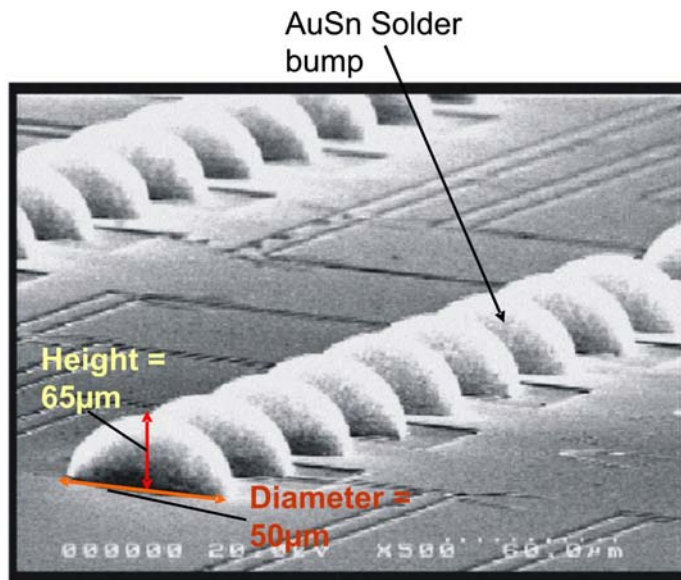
Picture taken from SEM – (1×12) VCSEL array AuSn solder bumps: Height of solder bump = 65µm, Diameter of solder bump = 50µm.
